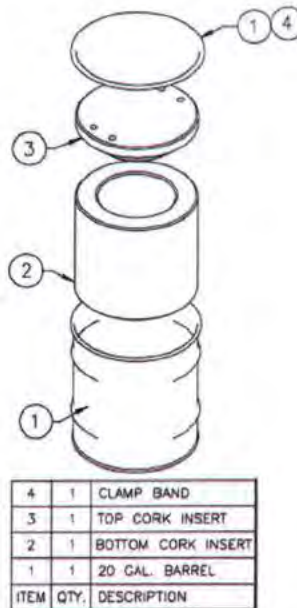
Exploded View of Model 976A Drum and Basic Inserts
